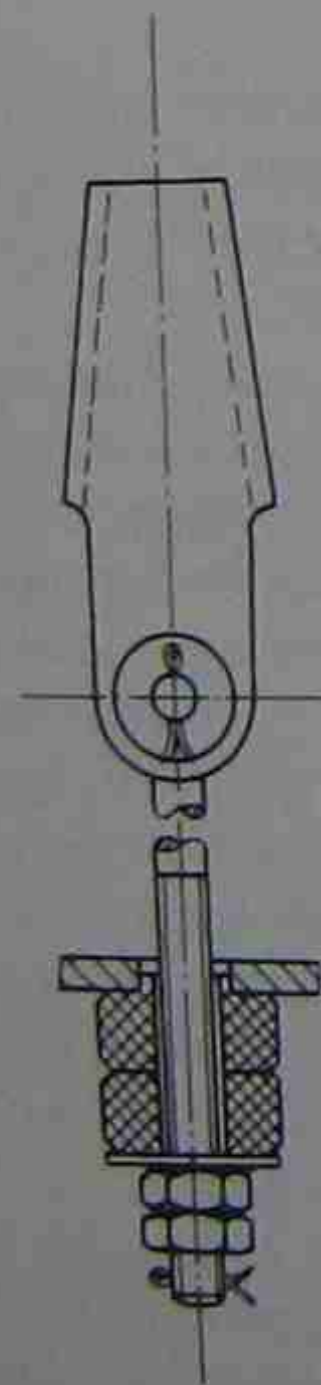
Suspension device with rubber buffers (Gustav Kocks GmbH).
